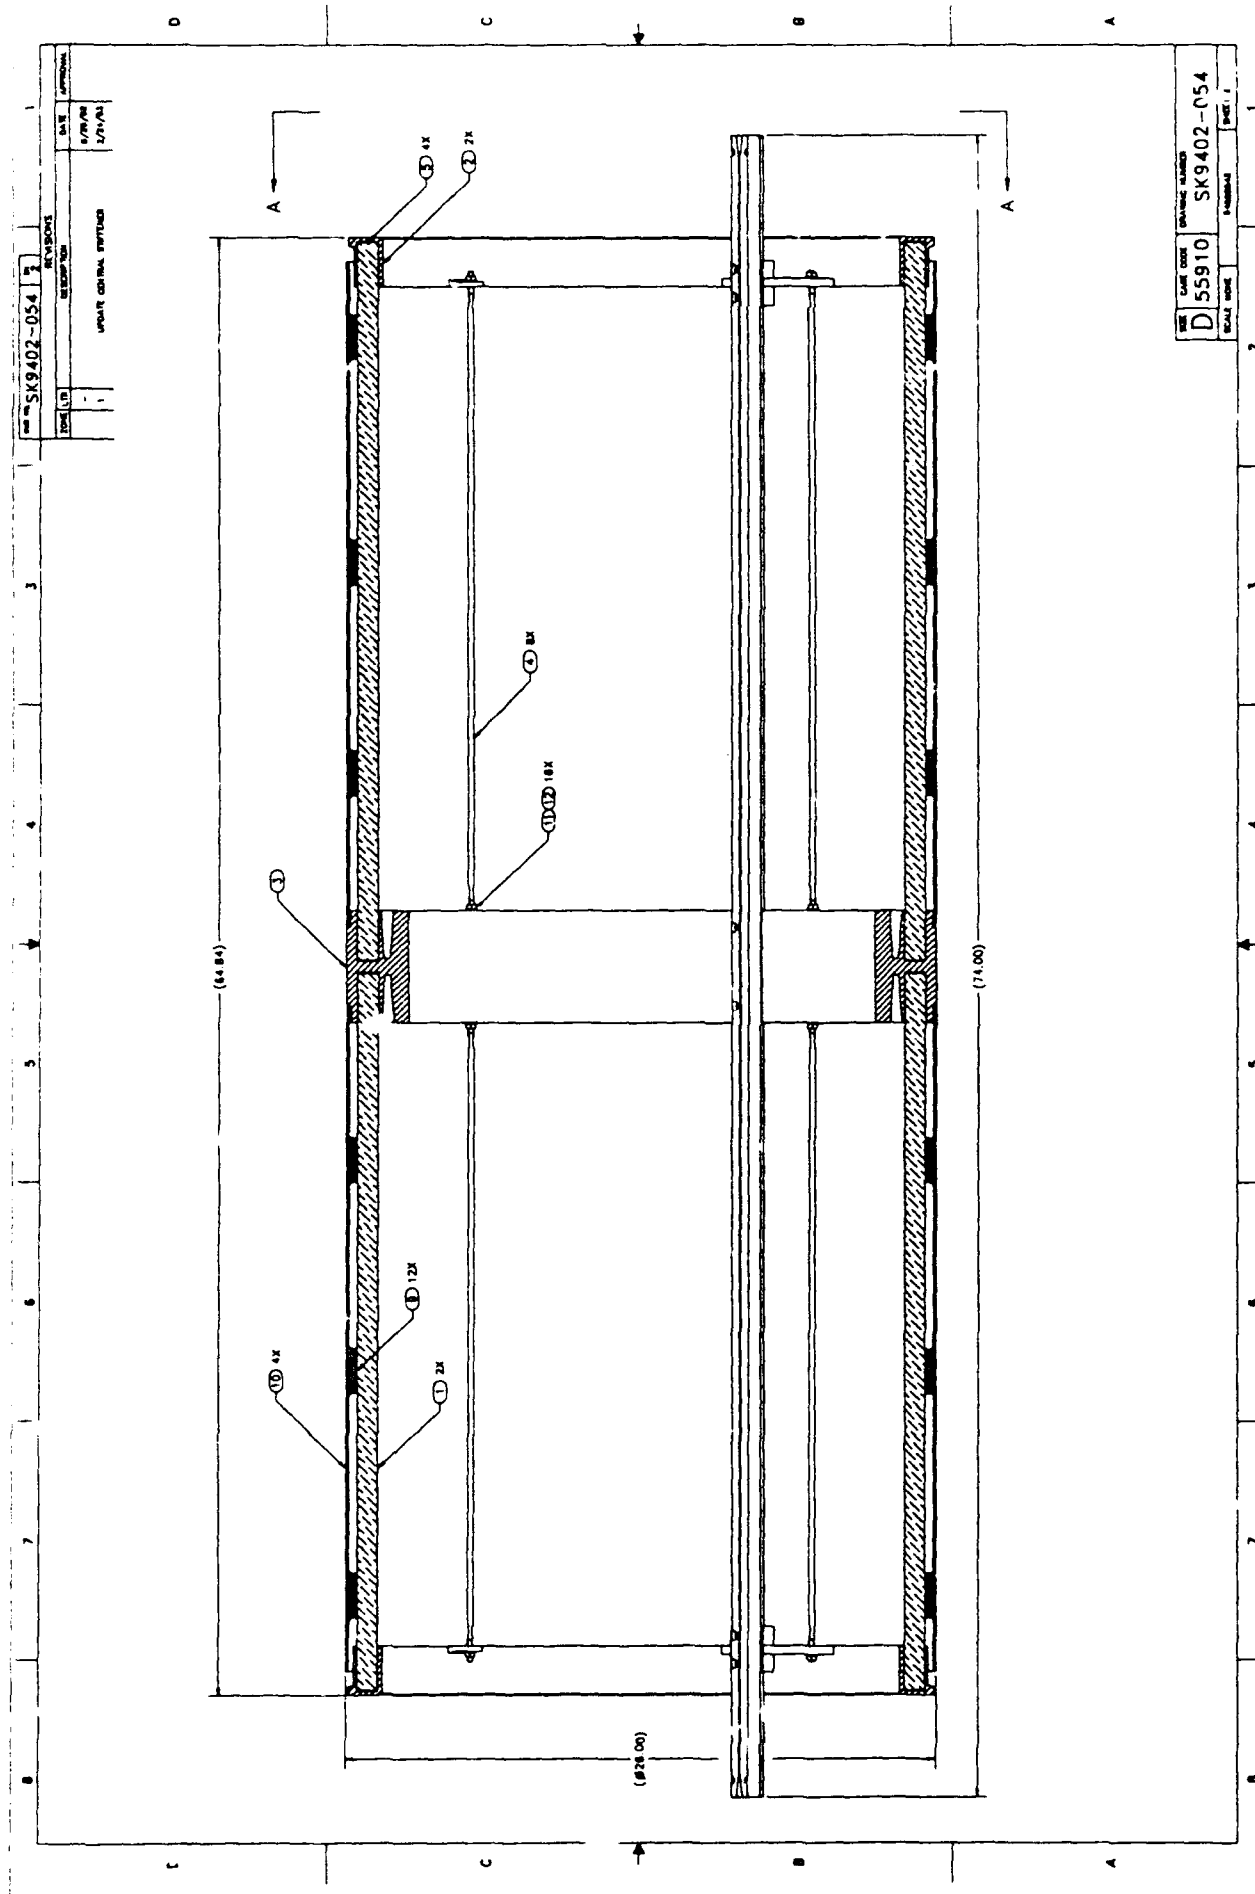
26-inch-housing cylindrical hull, sheet 2.
